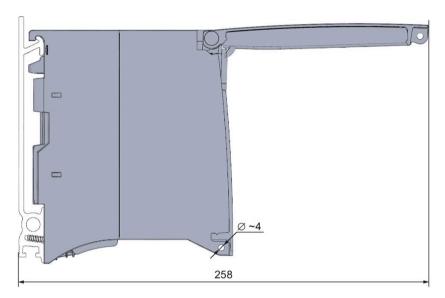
Dimension drawing CPU 1517-3 PN/DP, side view with open front panel
